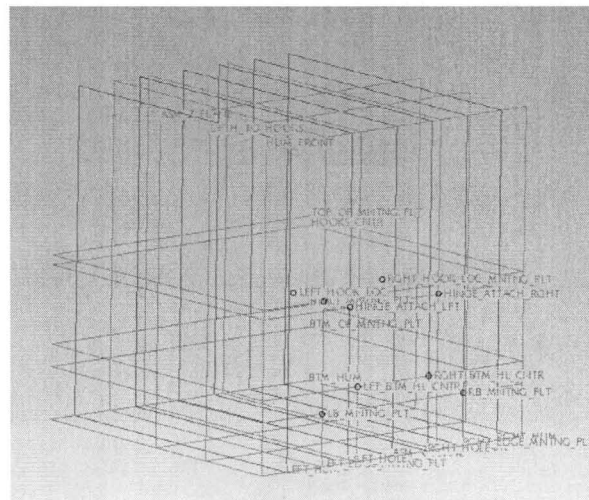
Skeleton for Hummer Mounting Plate Assembly
